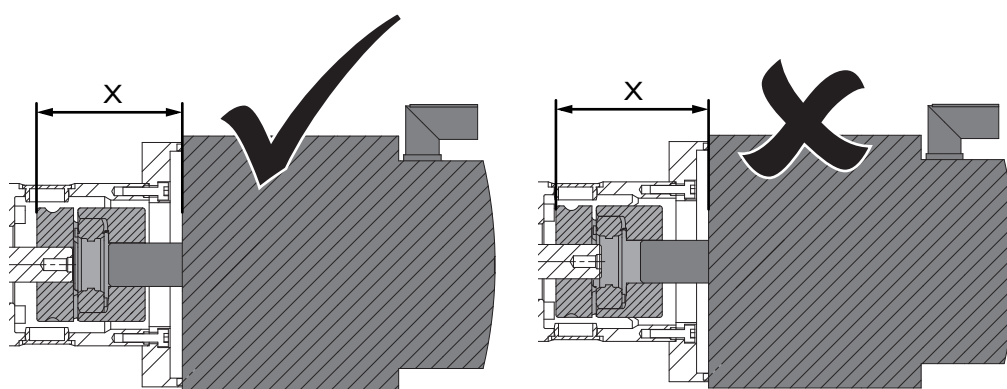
Position the coupling on the motor shaft: Make use of X dimension tolerance
